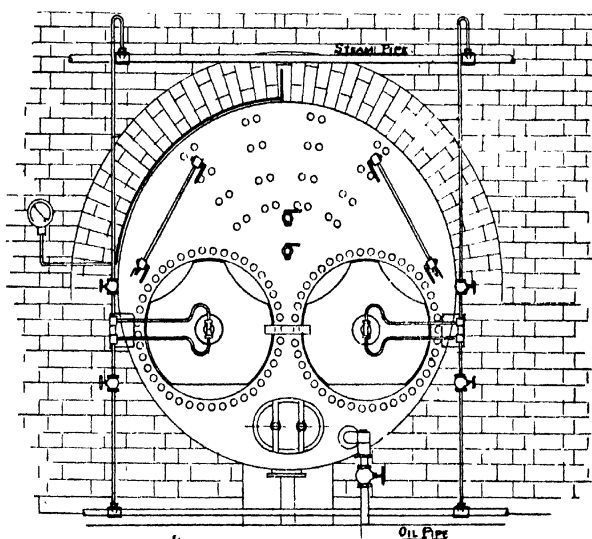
Arrangement of Lancashire Boiler for Liquid Fuel with Steam Burners.
